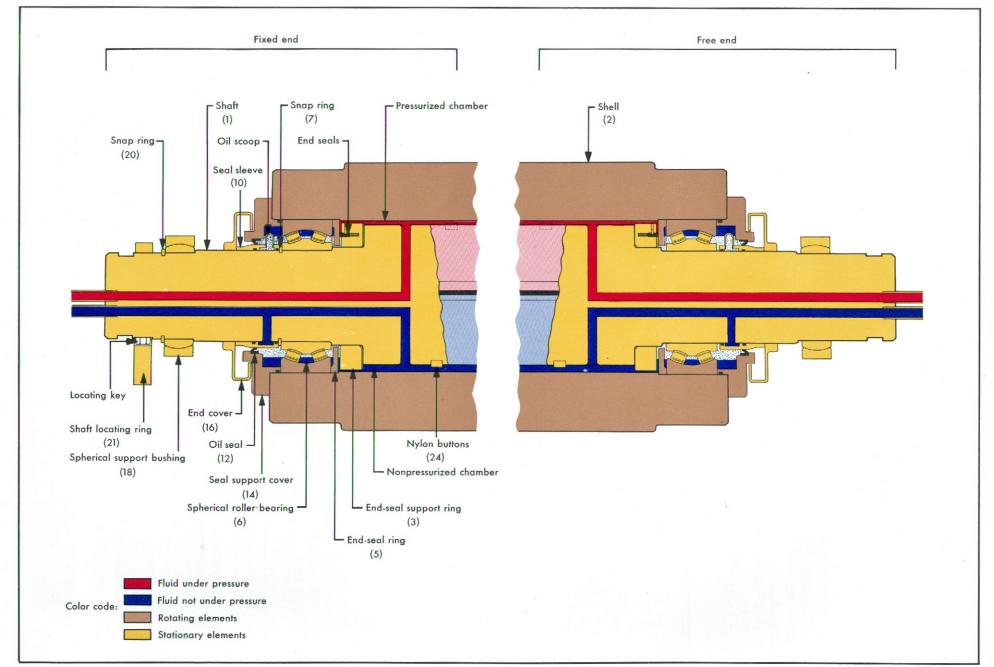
Non-Driven Swimming-Roll Basic Construction
